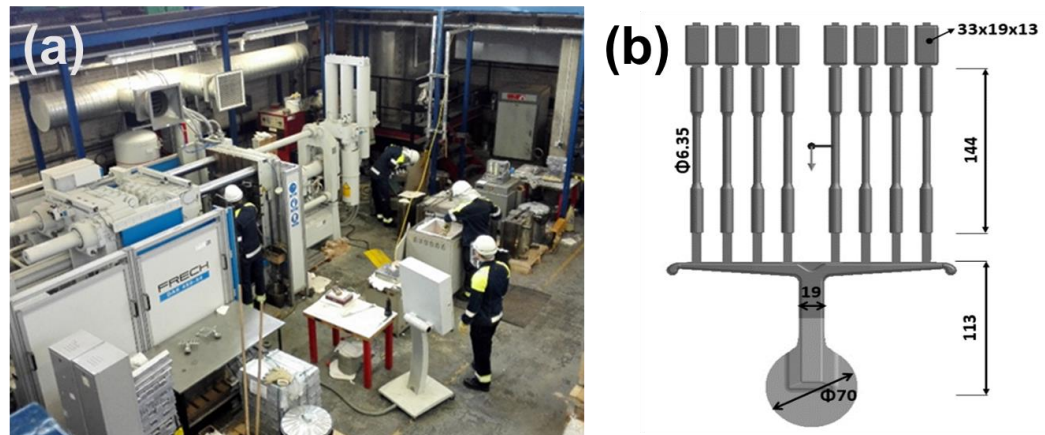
(a) High pressure die casting machine (b) the dimension of die casting with overflow and biscuit
